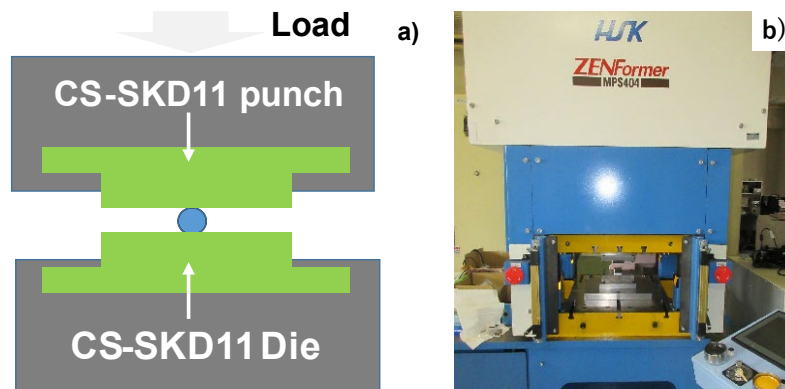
CNC forging system. a) Schematic view on the forging experimental setup, and b) overview on the whole forging system.
